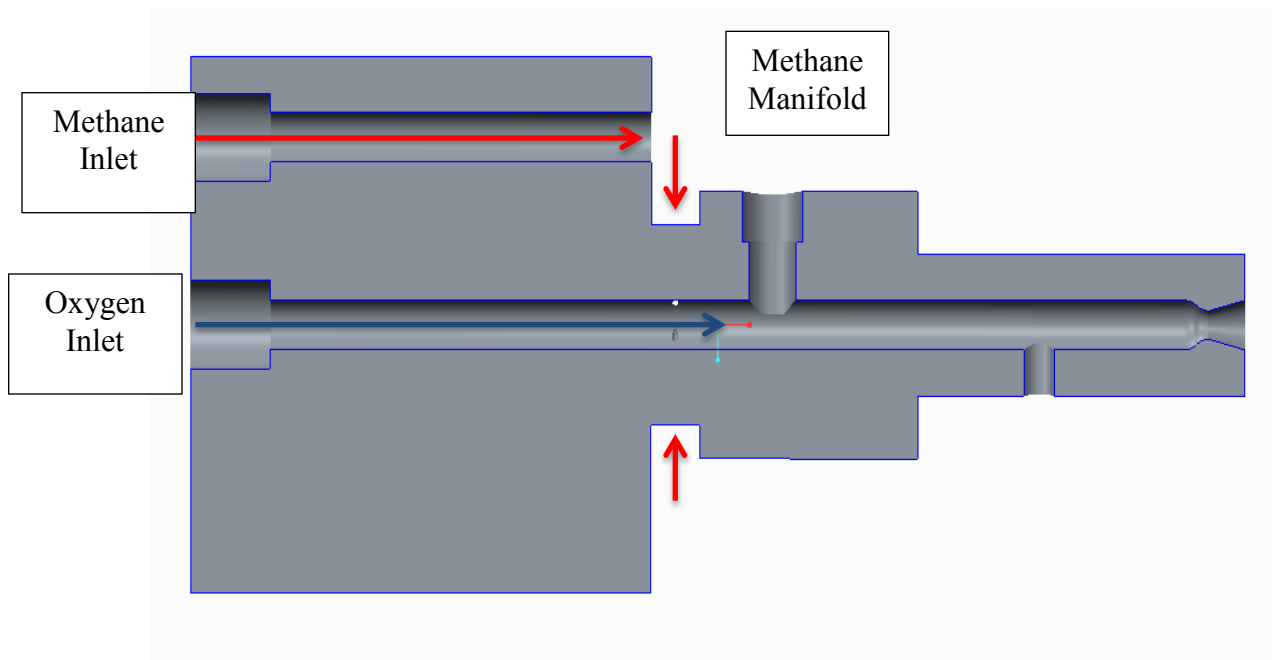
Swirl Torch Igniter # 1 Cross-Sectional View
